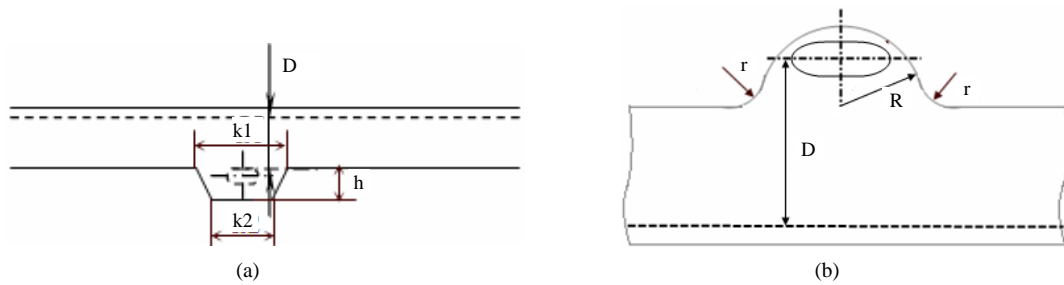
General tongue shape with hood week welding. (a) Trapezoid tongue, (b) hemicycle tongue
